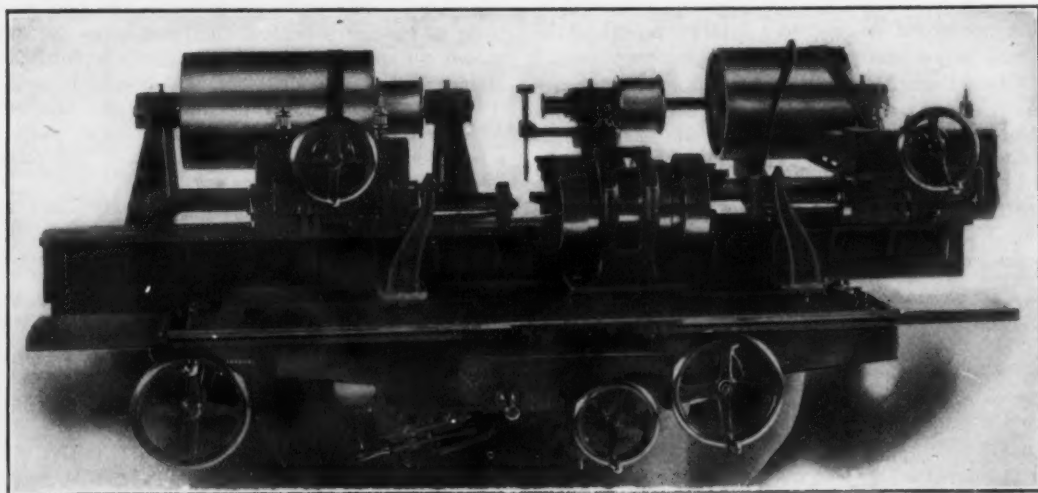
The Grinder Using Both Ends of a Single Headstock.
